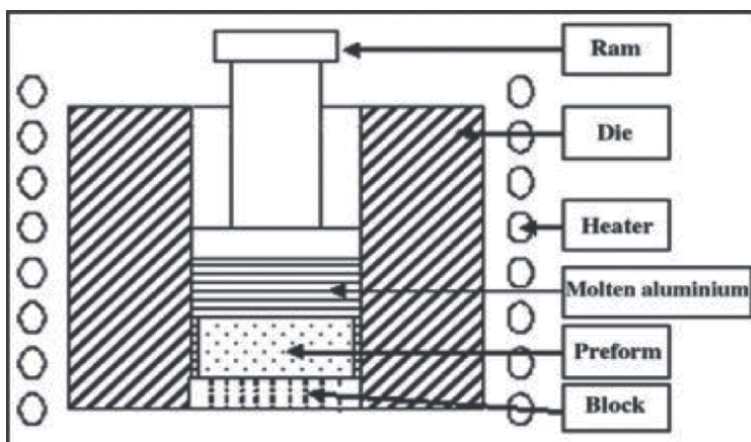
Schematic representative of a typical squeeze casting machine [10].
